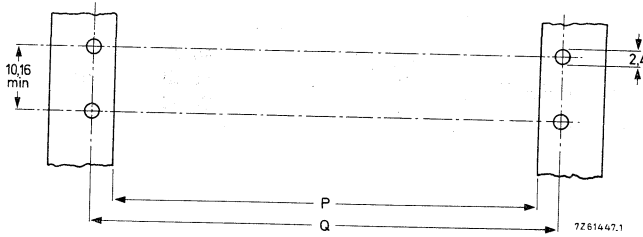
Hole pattern for rail mounting of male parts; see Table 4 for dimensions P and Q.
